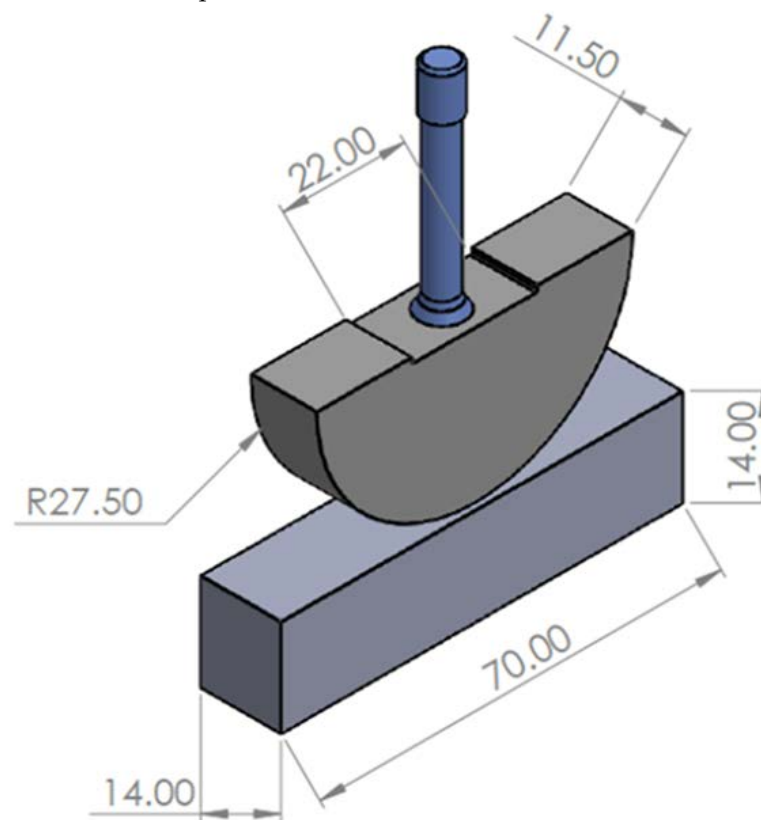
Dimensions for cylindrical and plane specimens used for tests.
